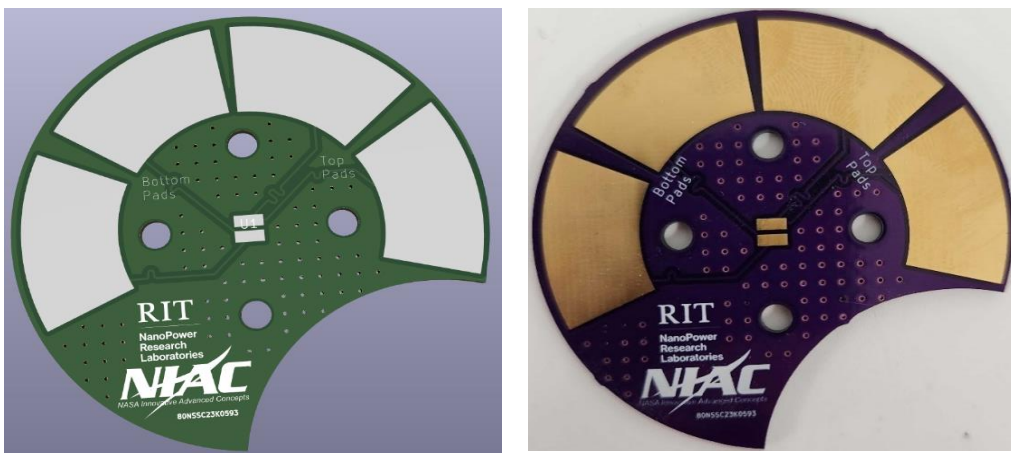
Upper Left) Designed PCB in the 3D viewer in the KiCAD software. Upper Right) The manufactured PCB as it arrived.
